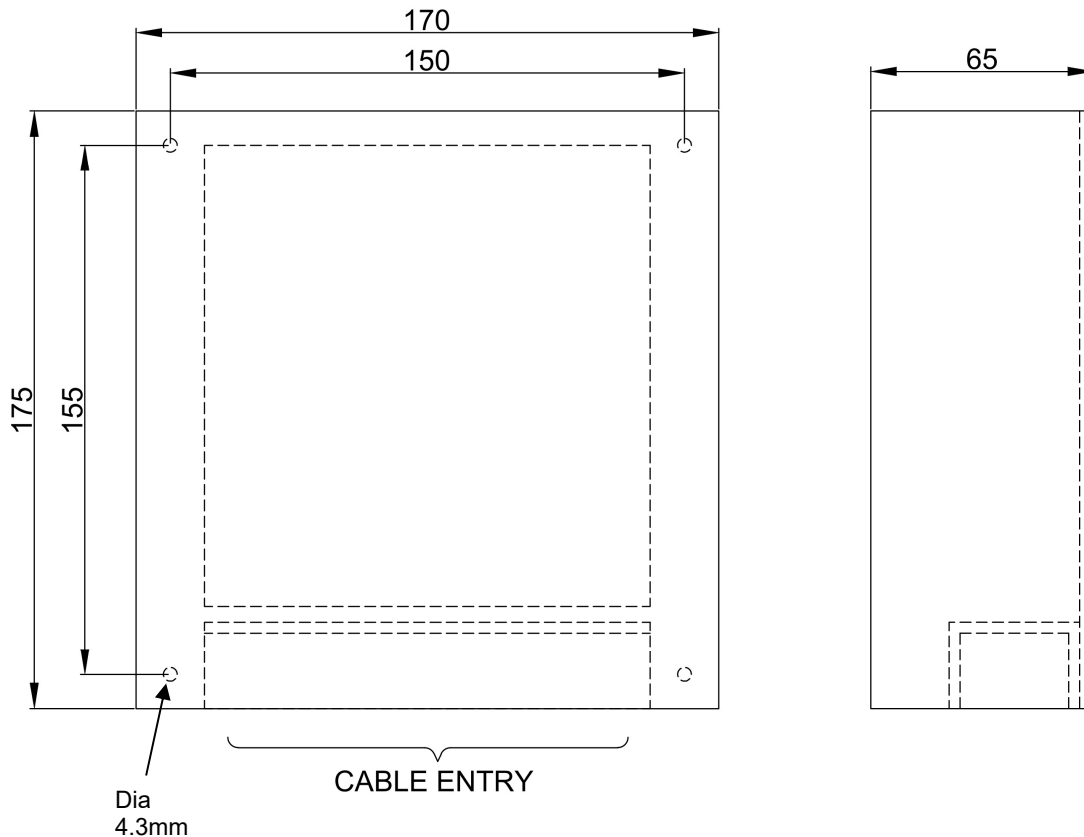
NT1750 EPR CU Flush / Panel Mounting Assembly Instructions.
